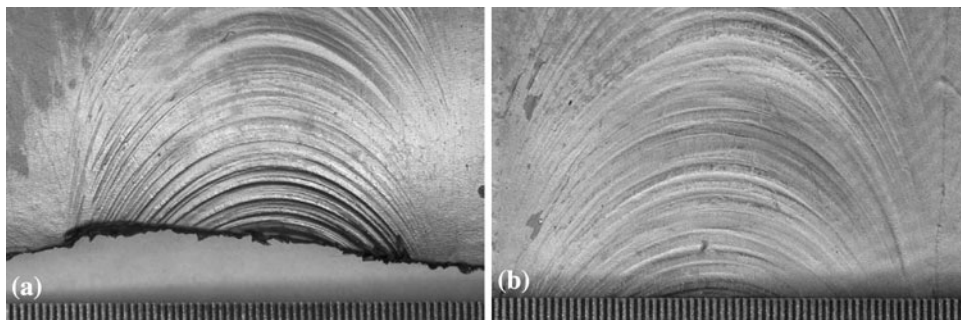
(a) Macroscopic view across the top surface of a superplastic formed FSW welds with severe deformation between the peaks of the pin tool marks. (b) The pin tool swirl marks after SPF with numerous very small fissures between many of the highly elongated valleys
